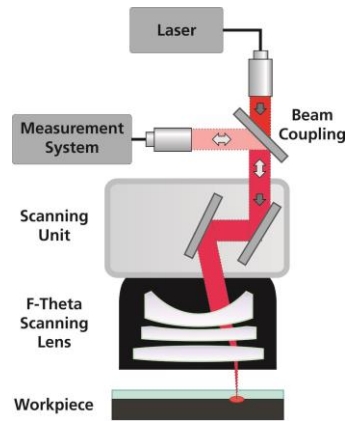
Example of a control solution concept with laser scanner for transmission welding (schematic view)
